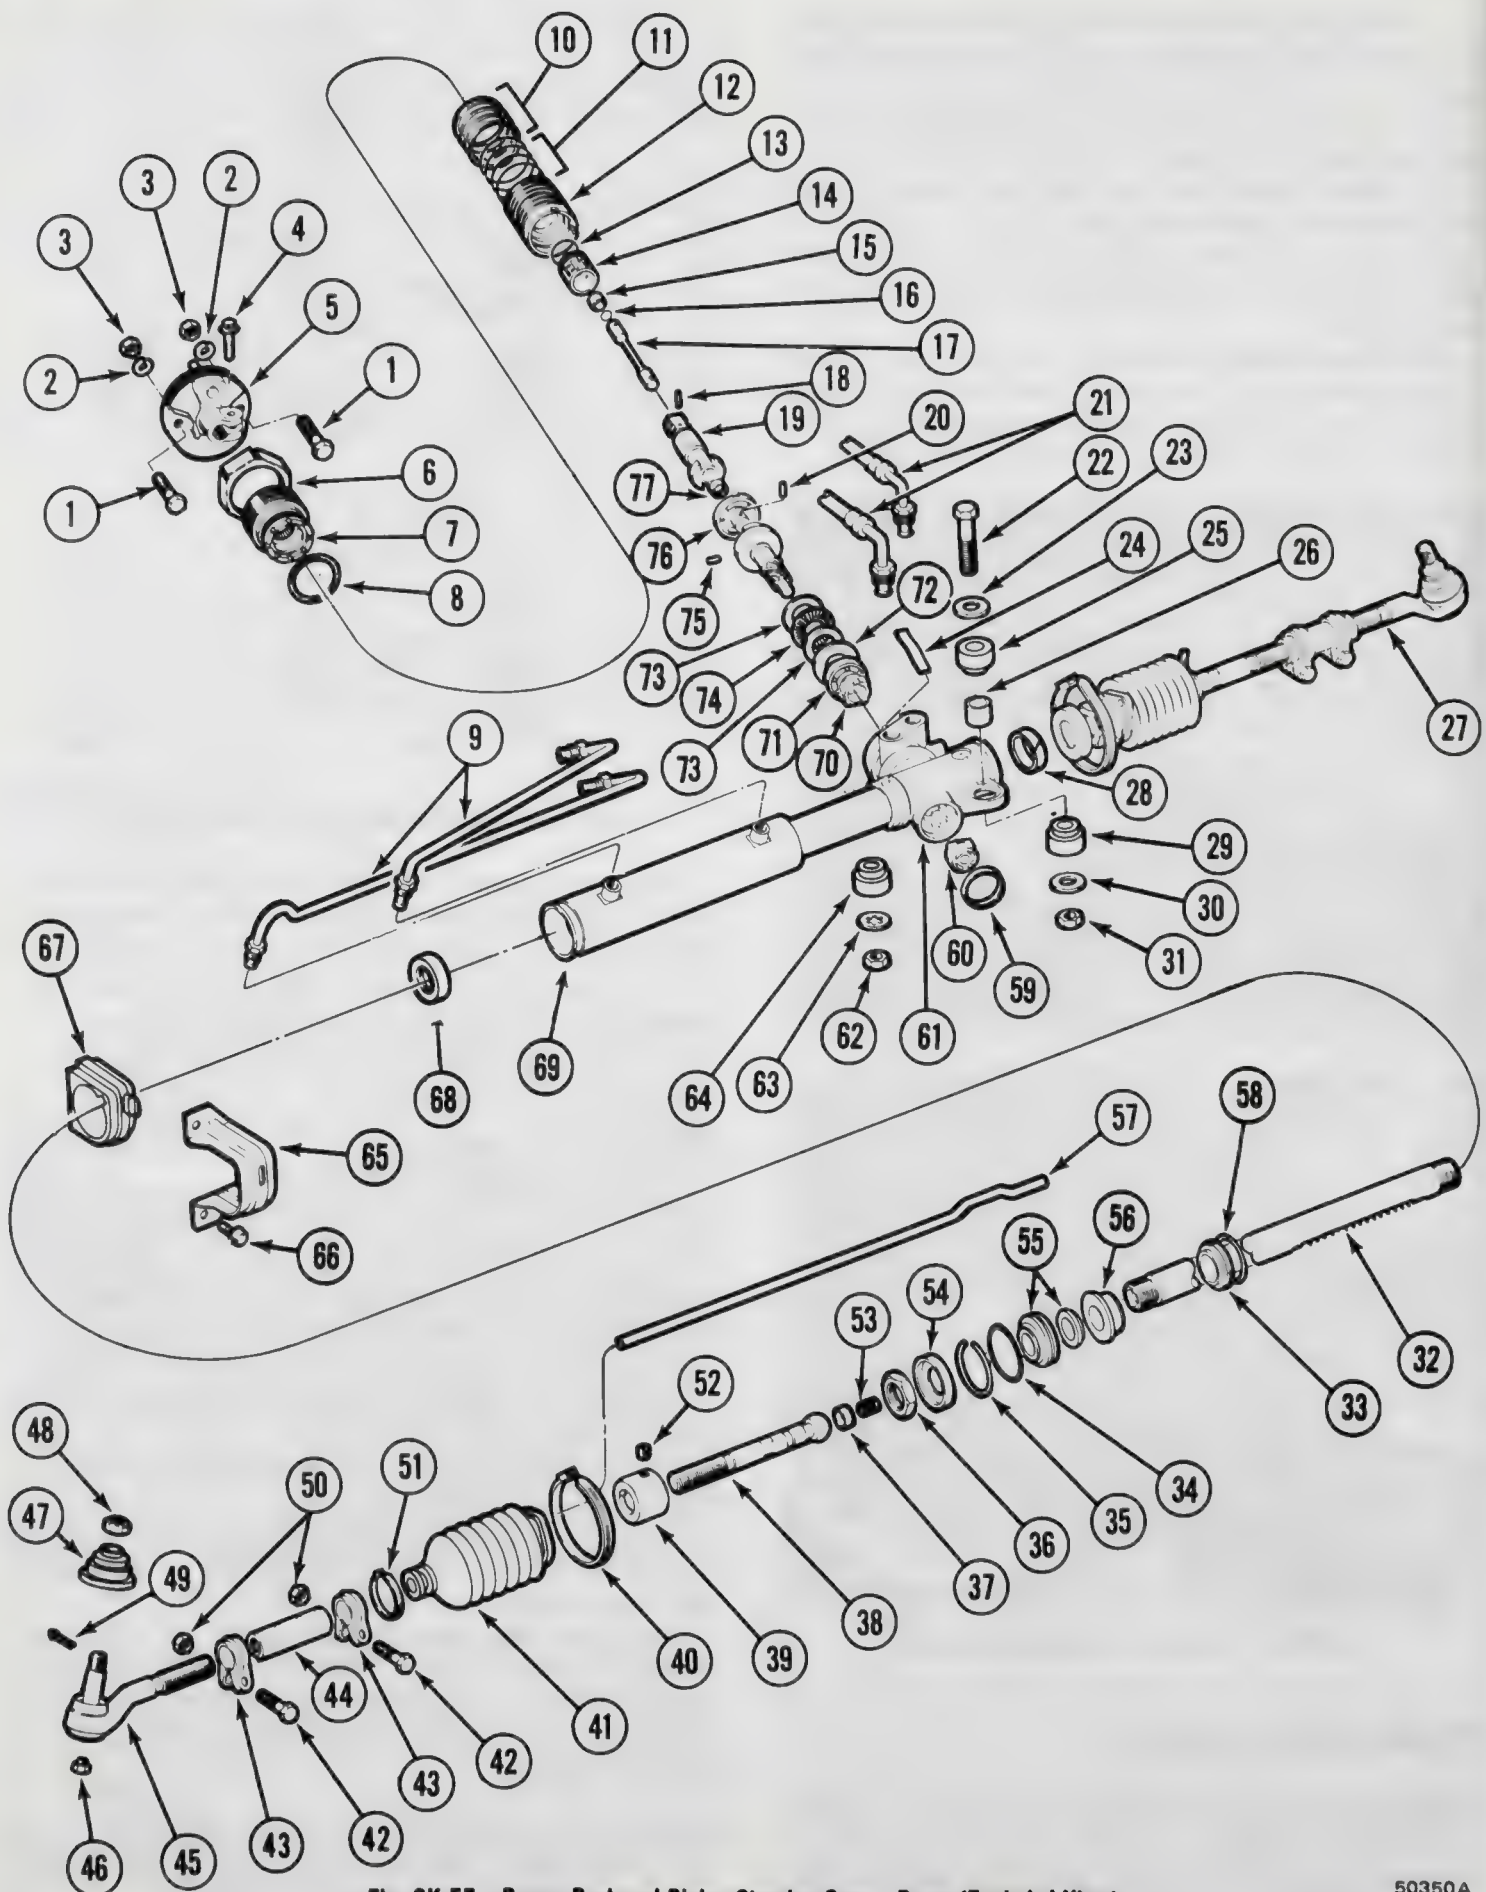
K-57 Power Pack and Pinion Steering Gear—Pacer (Exploded View)
